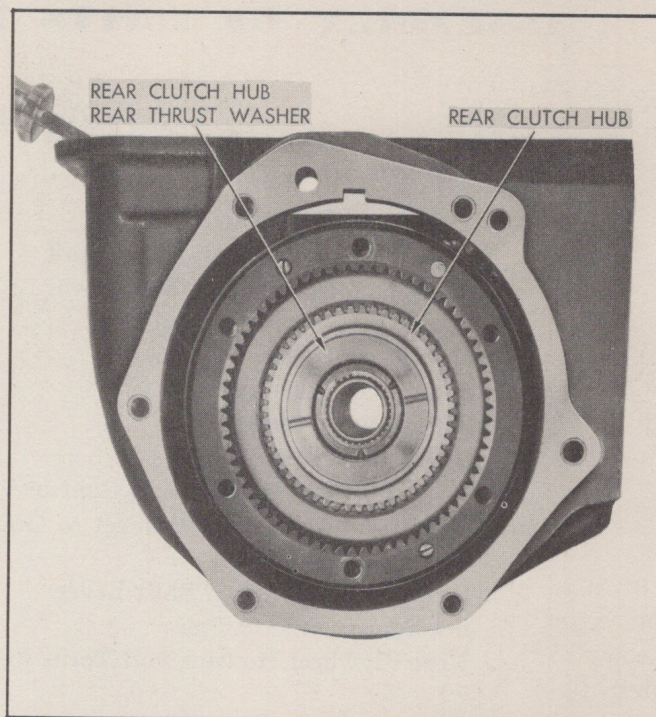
Rear Clutch Hub Rear Thrust Washer Installed
